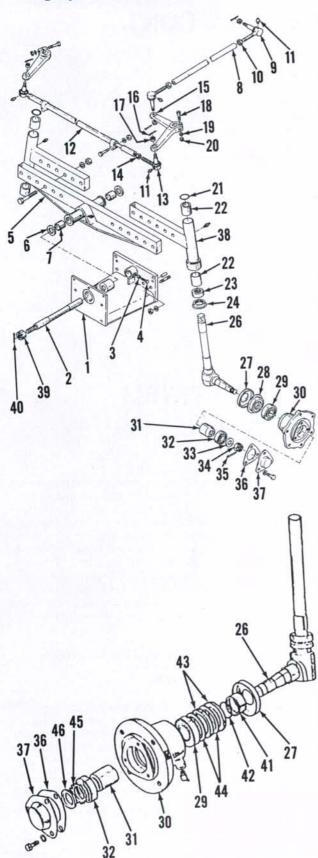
Exploded view of spindle and hub components used on Model L210. For parts identification, refer to legend in Fig. 1 except for the following:
